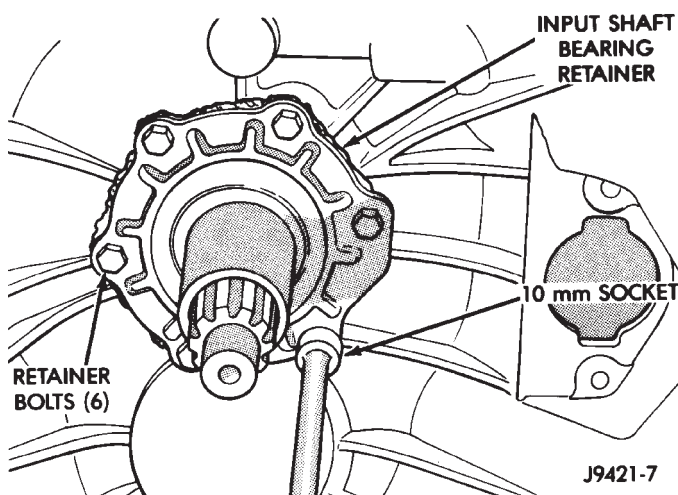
Installing Input Shaft Bearing Retainer Bolts
